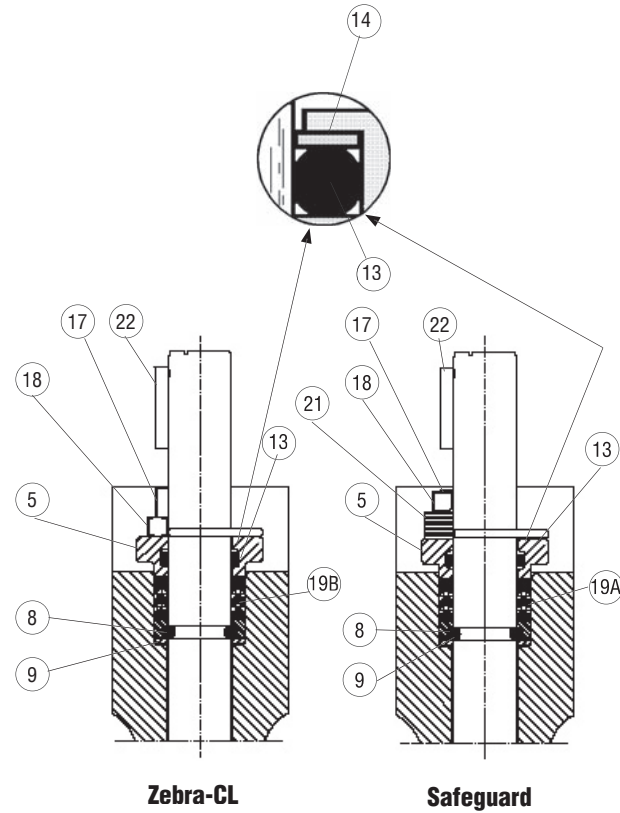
ShearStream SB - spare parts, types of stem sealings and seat rings
